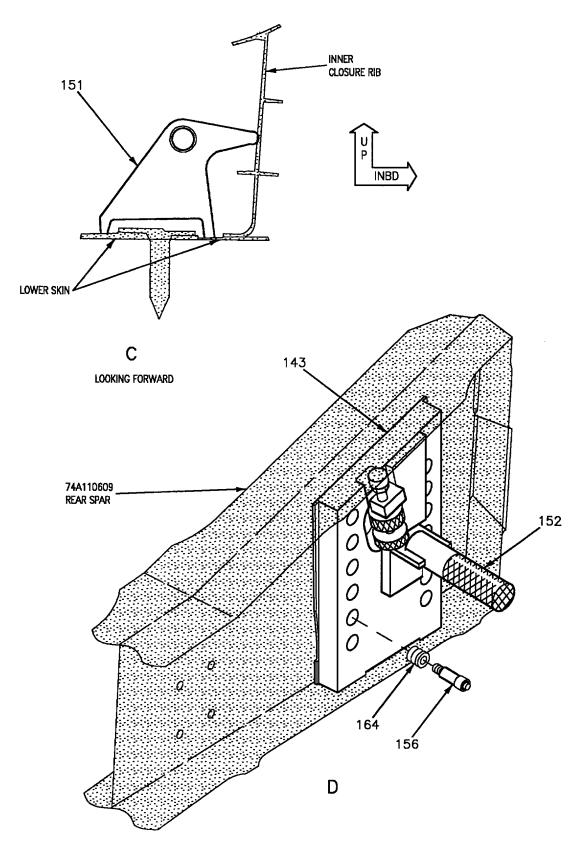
Installation of RE174110964 Locating Tool (Sheet 3)
